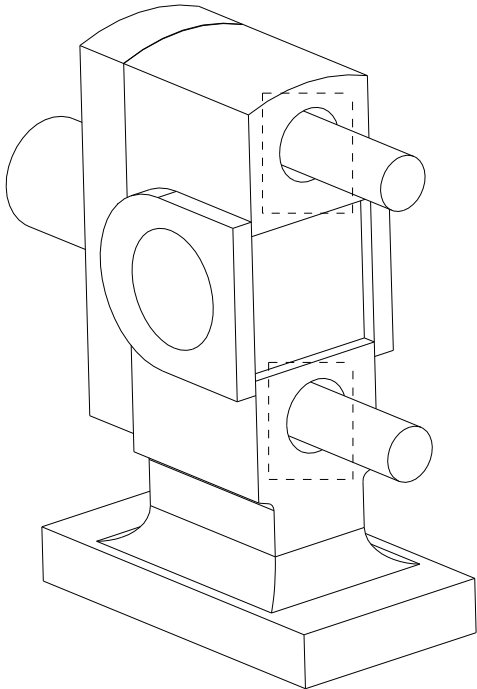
shows the Crosshead assembly. It is clear from the assembly that the diameter of the hole is more than what is required (shown using dotted lines). In an ideal case, the diameter of the hole should be equal to the diameter of the bolt.
